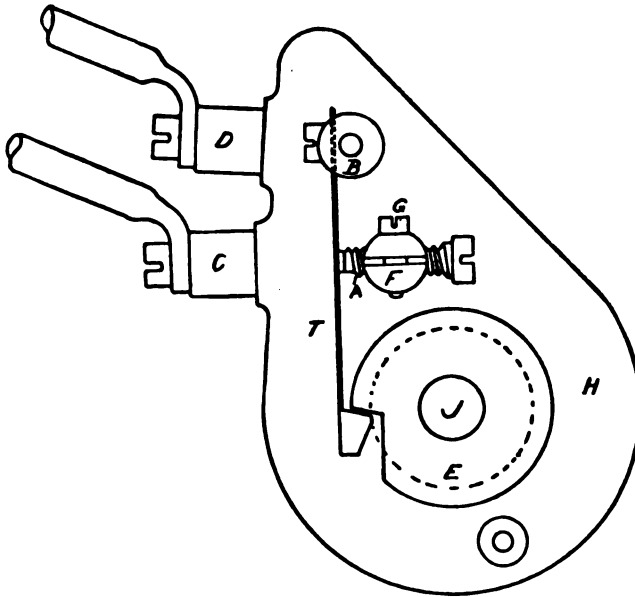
PLAN OF DE DION CONTACT-BREAKER FOR HIGH-TENSION IGNITION.
